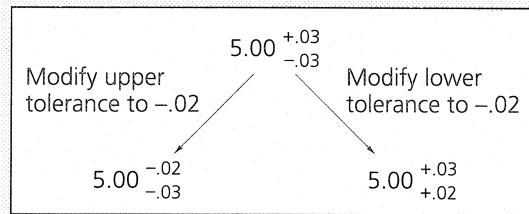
FIGURE C Modifying Upper and Lower Tolerance Values
